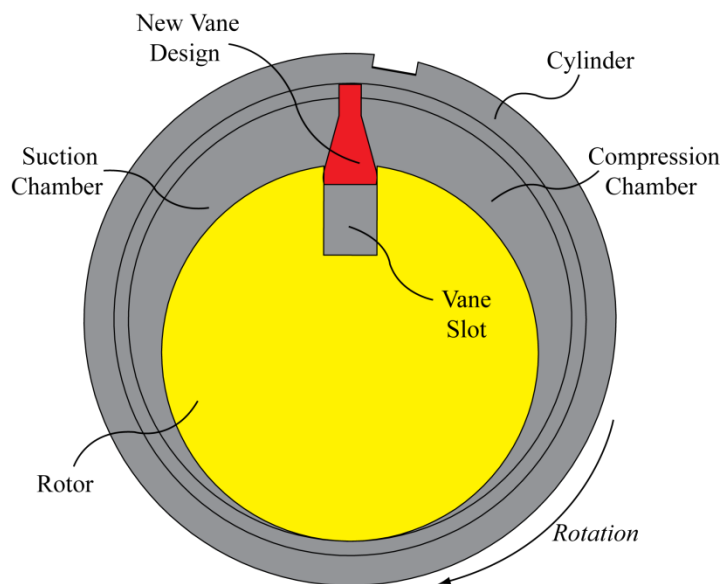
New Vane Design in Cylinder-Rotor Assembly
